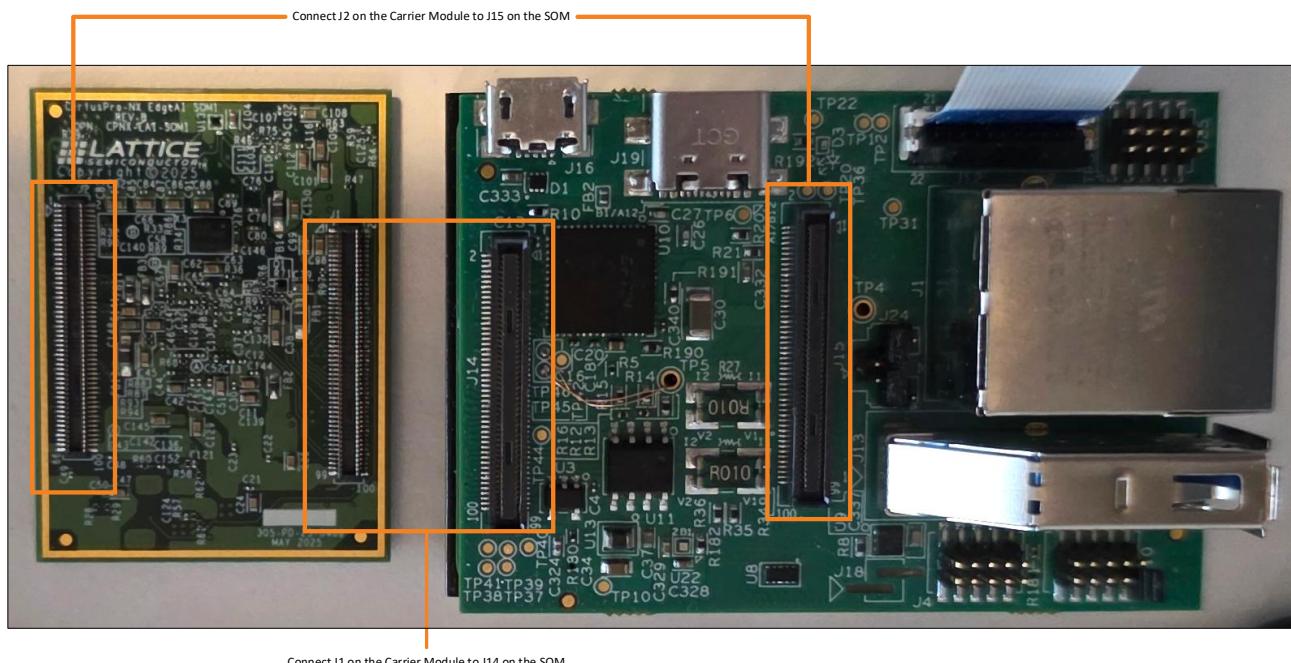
Bottom of SOM and Top of Carrier Board with Connection Details
